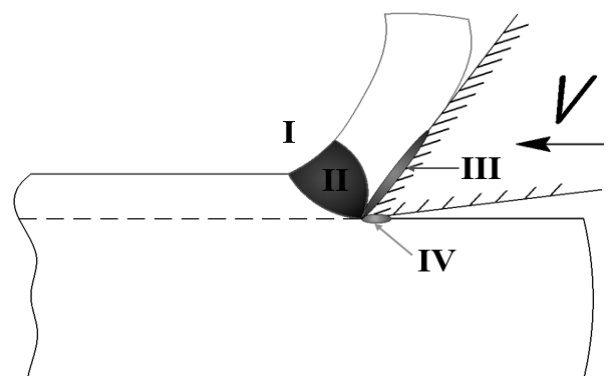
Chip formation process in metal cutting. I – the outside of the chip, II – deformation zone, III – cutting tool-chip contact zone, IV – cutting tool-workpiece contact zone
